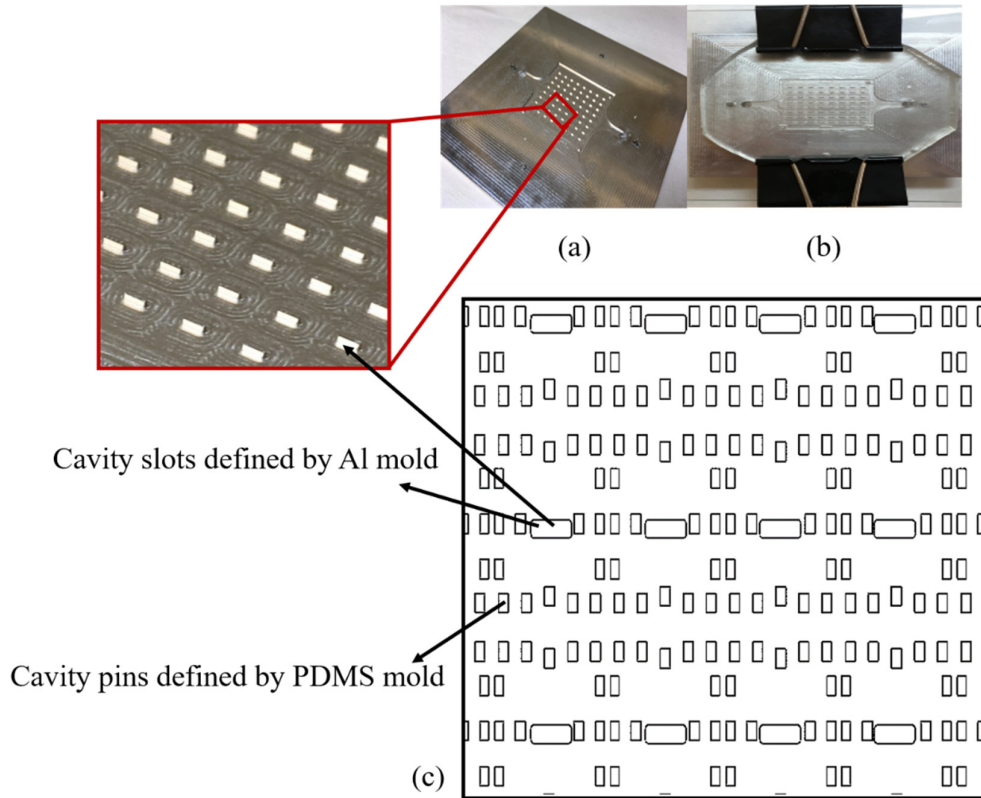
Misalignment between PDMS mold and Al mold. (a) Al mold for the cavity layer, (b) placing PDMS mold with the aluminum mold for injection molding of OSTEMER, (c) schematic of misalignment that happened during placing two molds.
